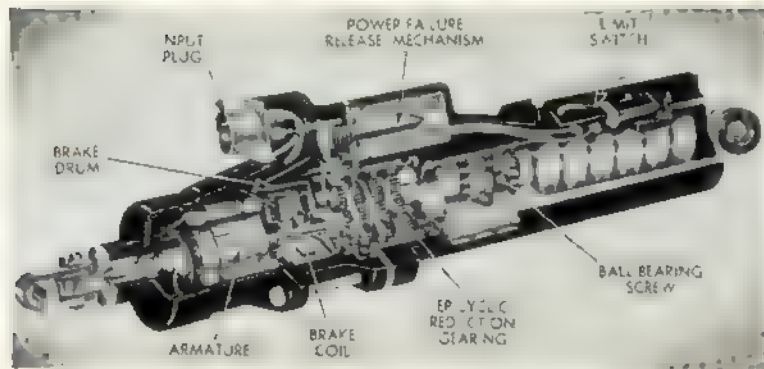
Linear actuator developing 2,500 lb. thrust or tension. Weight: 10.5 lb.
